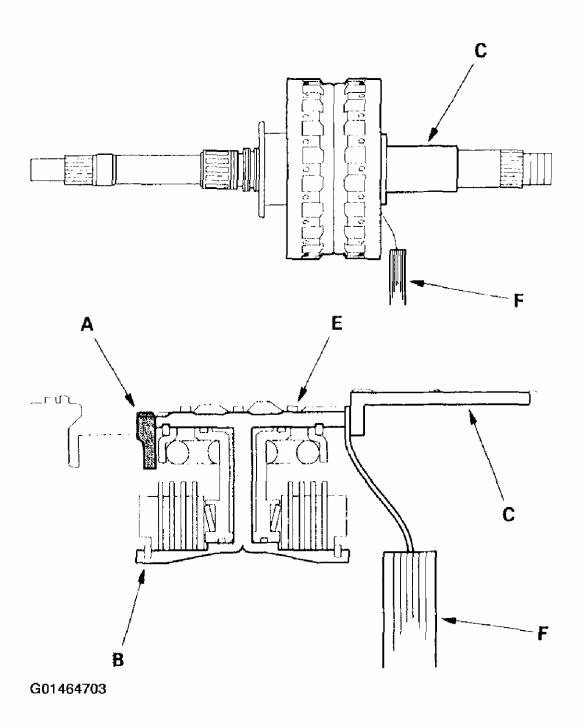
Assembling The 41 X 73 mm Thrust Shim, 4th/5th Clutch Assembly & 5th Gear Collar On The Mainshaft
